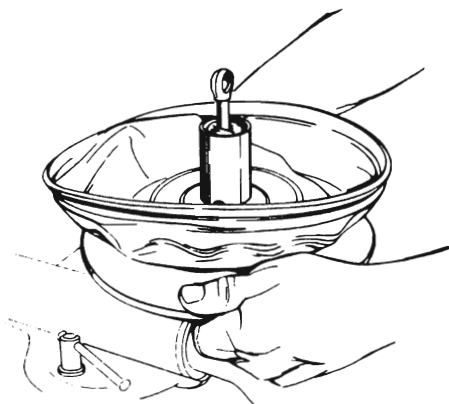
Locking or Unlocking Primary Support Plate From Primary Power Piston
